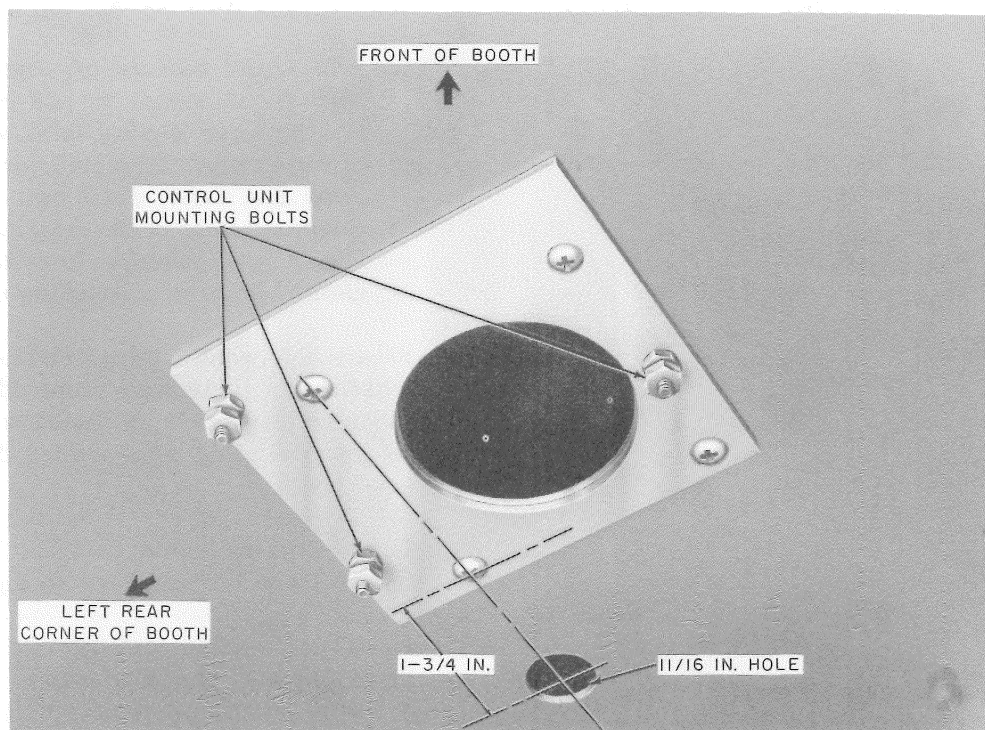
Installation of Adapter Plate to Ceiling of KS-16797 Booth
